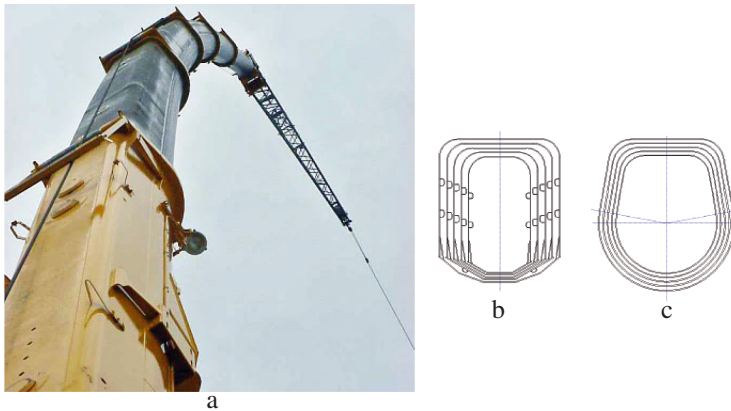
Deformation of a telescopic boom under heavy loads (a) and their old and new cross section shapes (b and c) [91]
